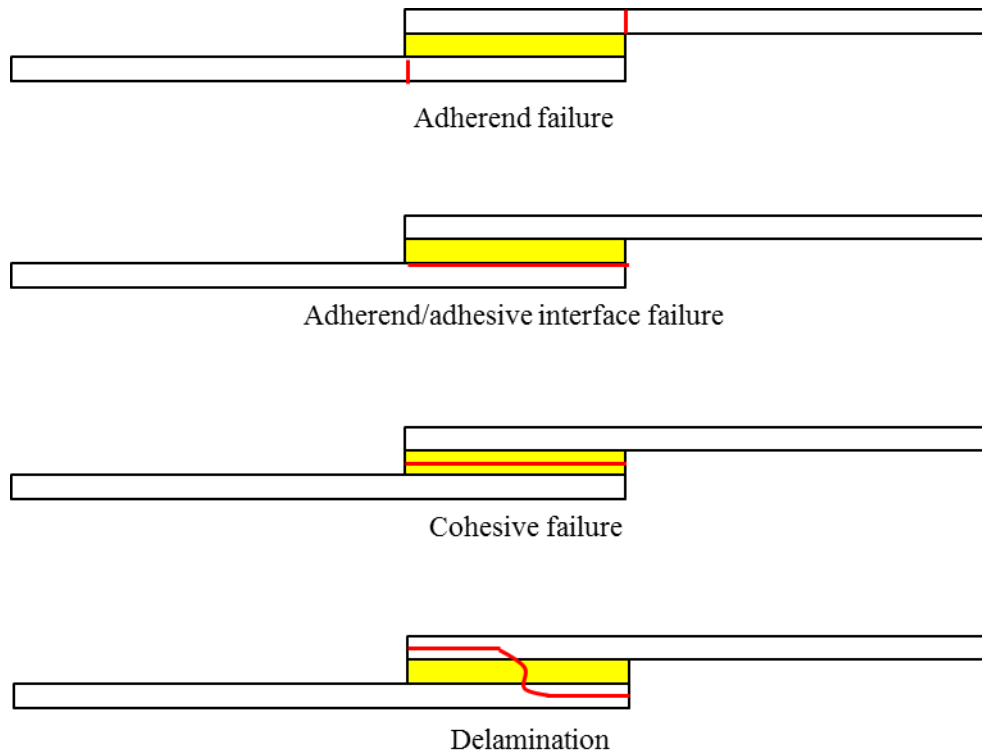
Typical failure modes of adhesive-bonded joints
